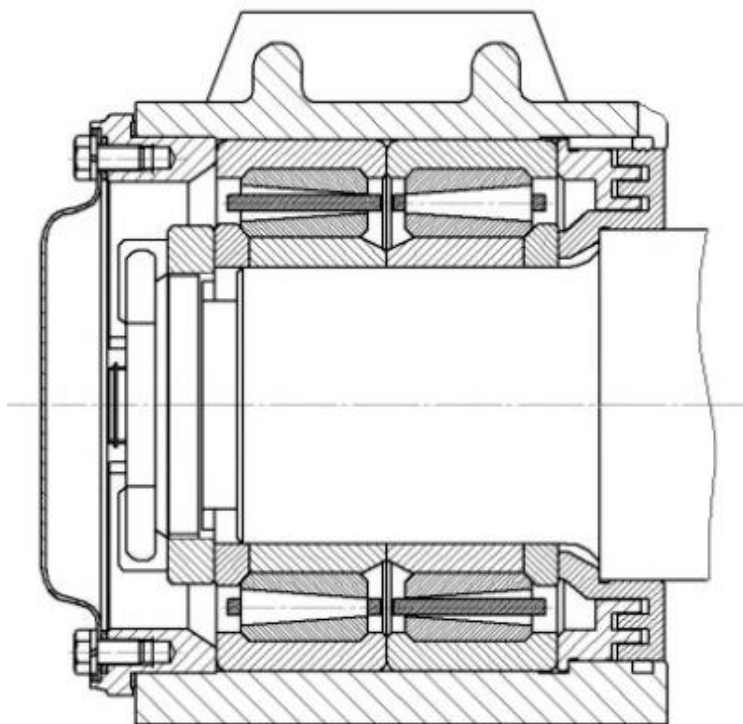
An axle box assembly with bearings equipped with hollow rollers
